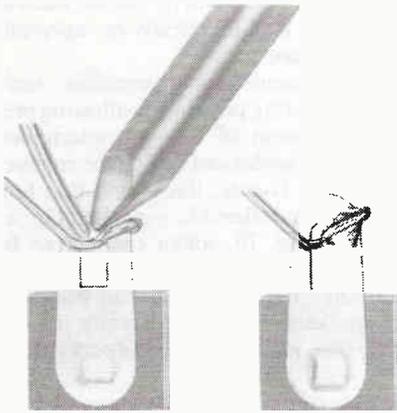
A PROPERLY-SOLDERED terminal connection looks like this.
